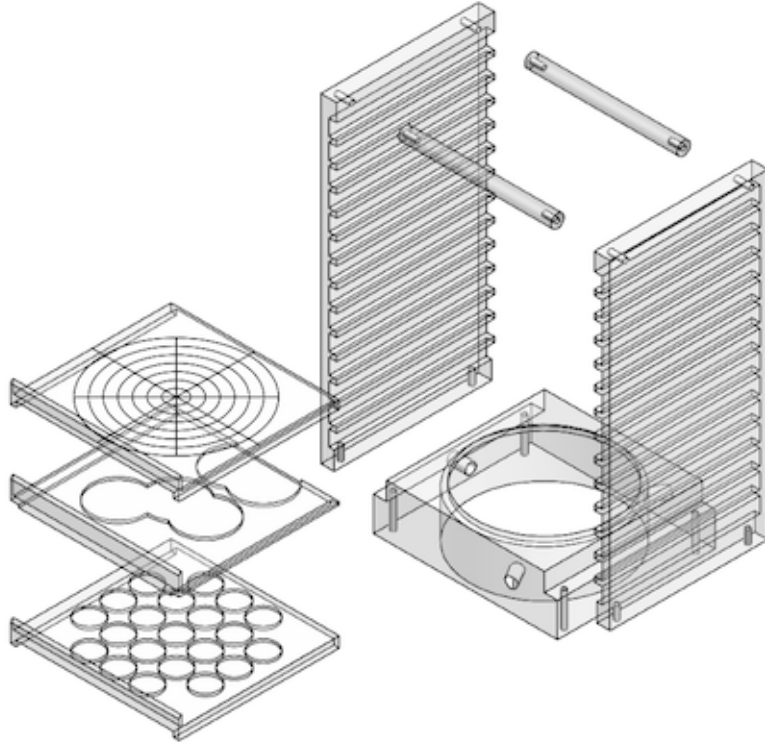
Exploded view of plastic sample holder designed and fabricated for this work.
